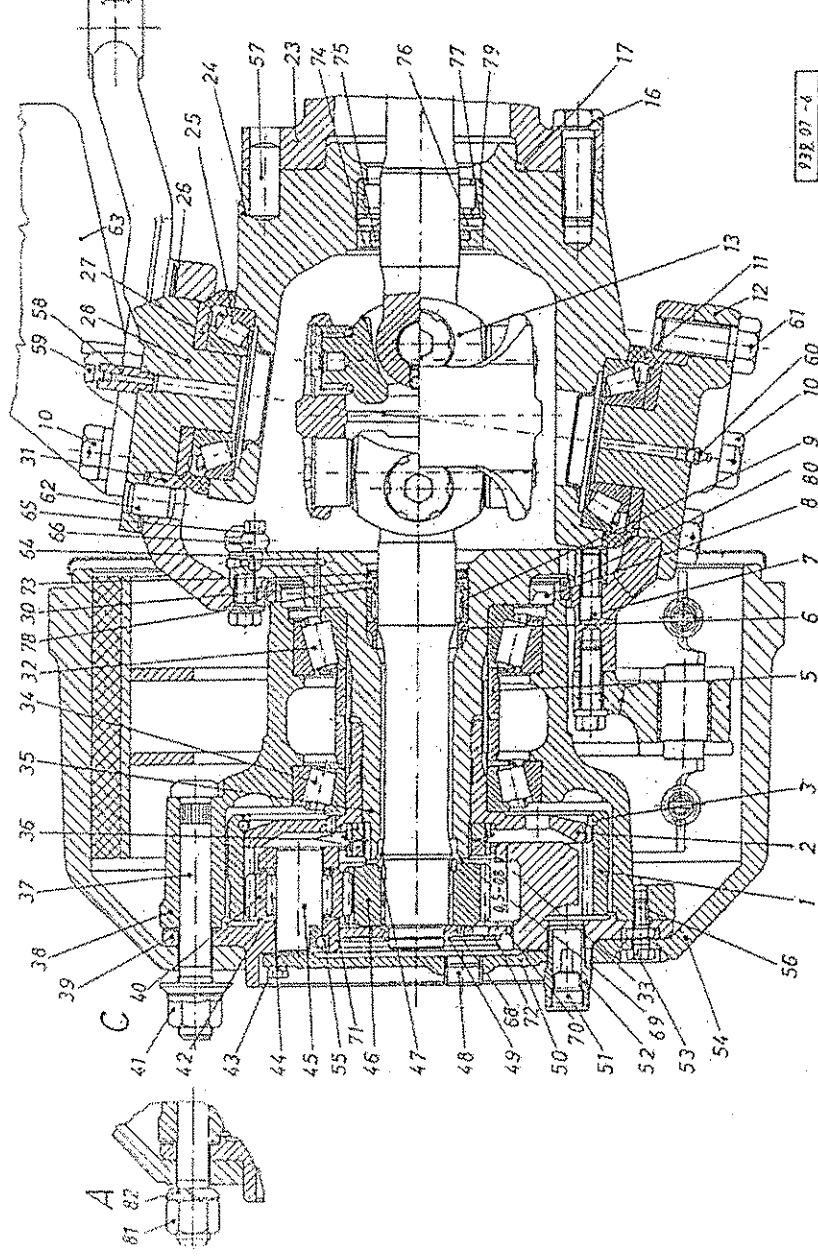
WHEEL DRIVE, WHEEL HUB SECTIONAL VIEW
